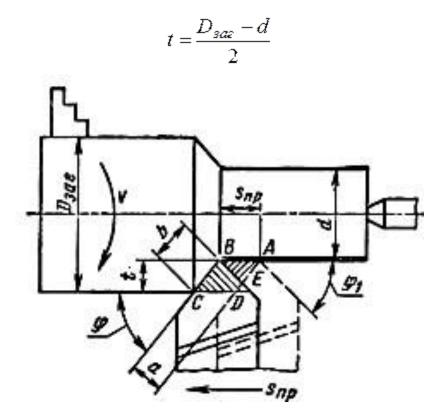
Two consecutive positions of the cutter relative to the workpiece where \vec{d} is the diameter of the processed cylindrical surface, mm.
